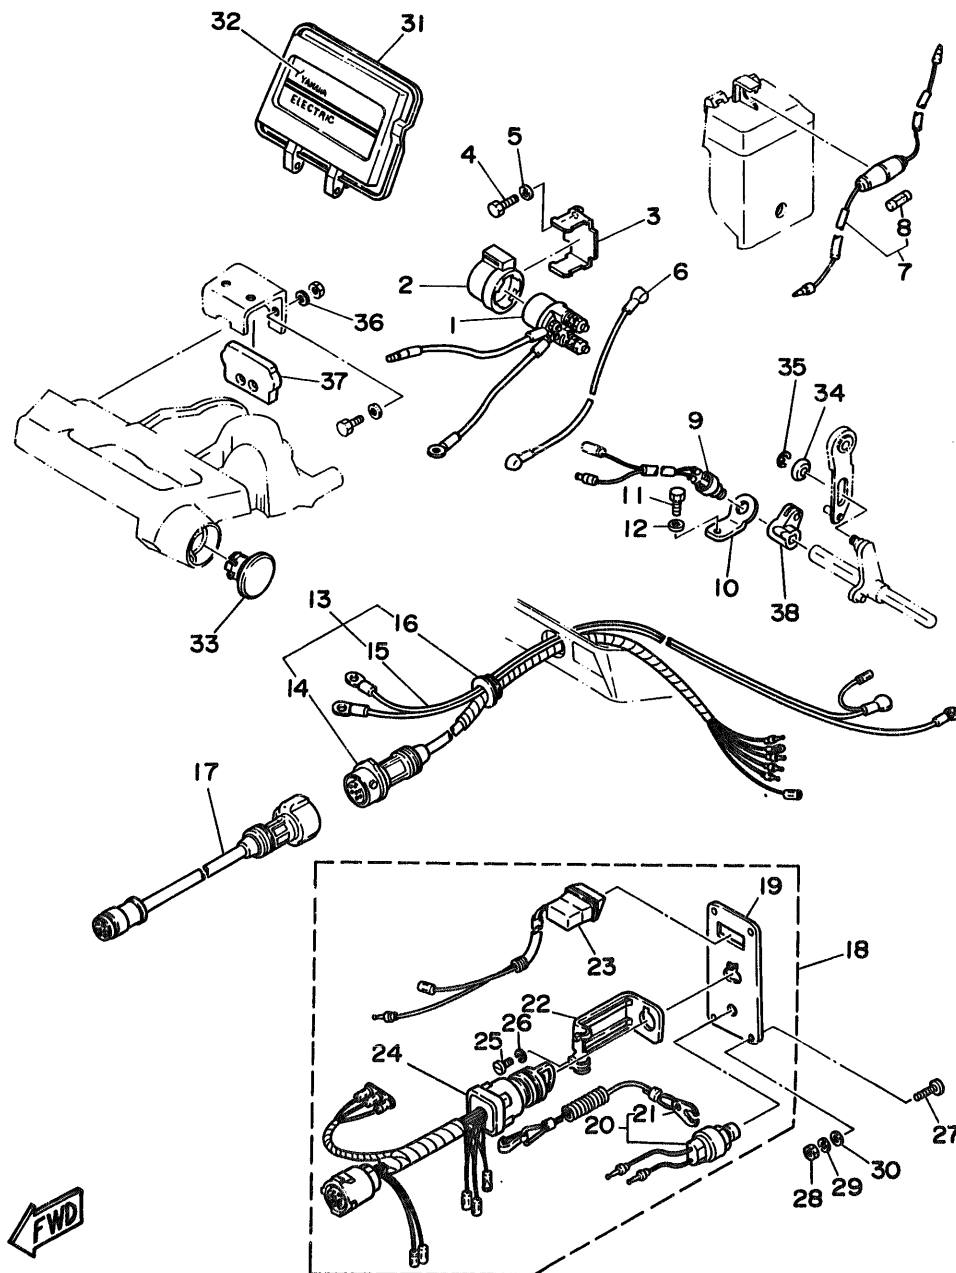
ELECTRIC PARTS 2 (F9.9AE MODEL)
